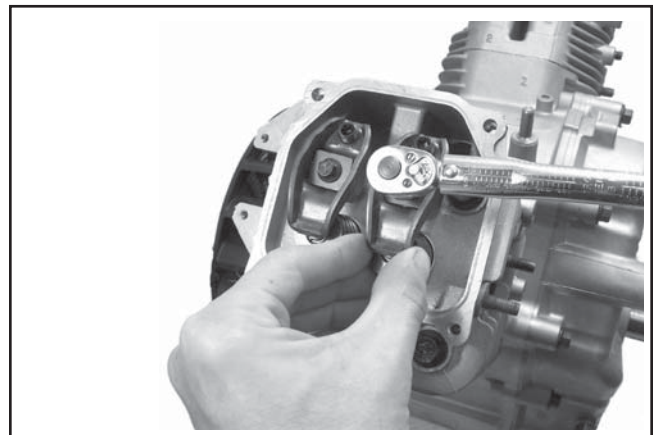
Cylinder Head Fastener Torque Sequence.
